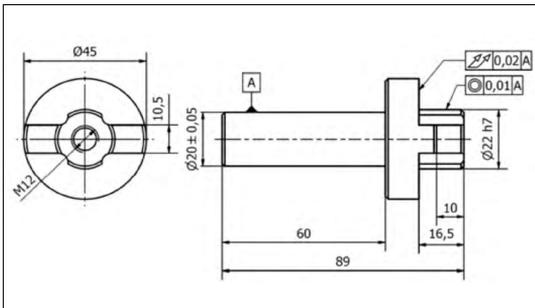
Drawing of the intermediate piece required to clamp the tool.
